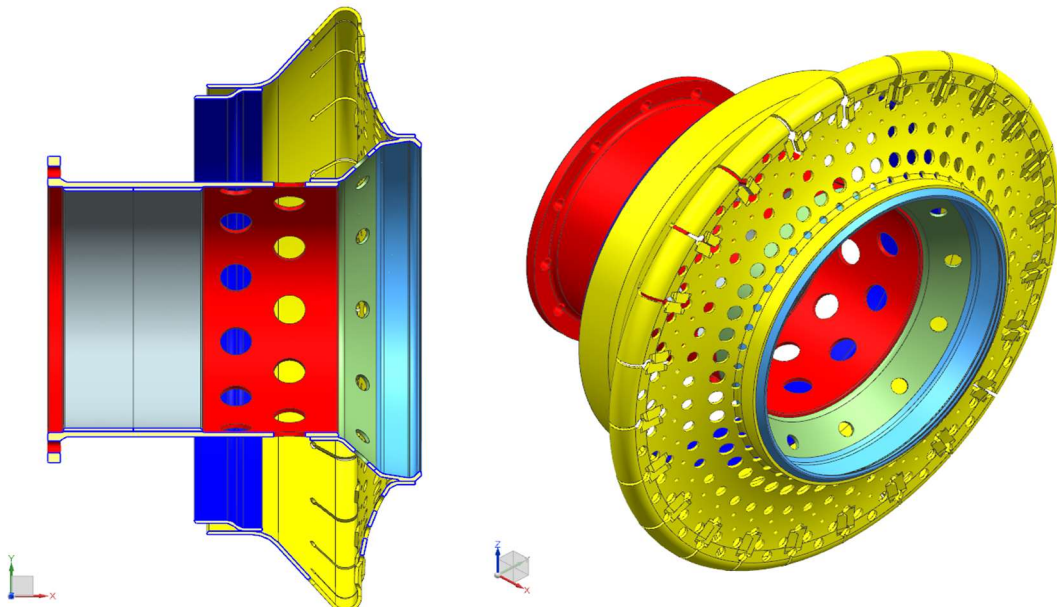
Inner Liner assembly - Section view (left) and Isometric view (right)
